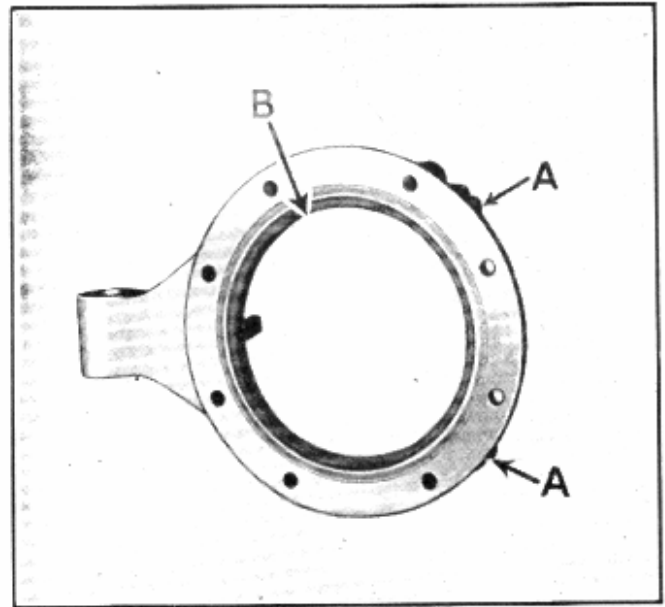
Steering Knuckle Retainer Flange 5" Joint
